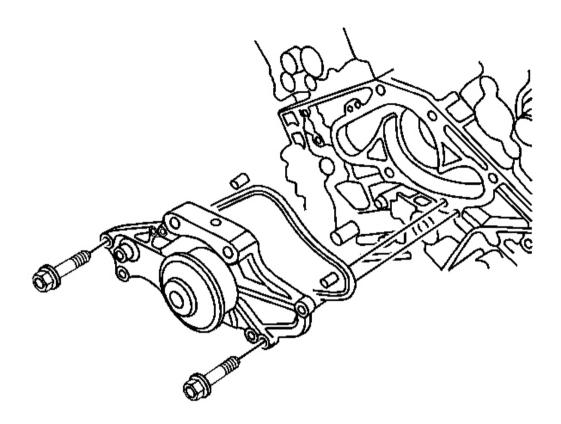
View Of Water Pump Assembly Bolts Courtesy of GENERAL MOTORS CORP.
